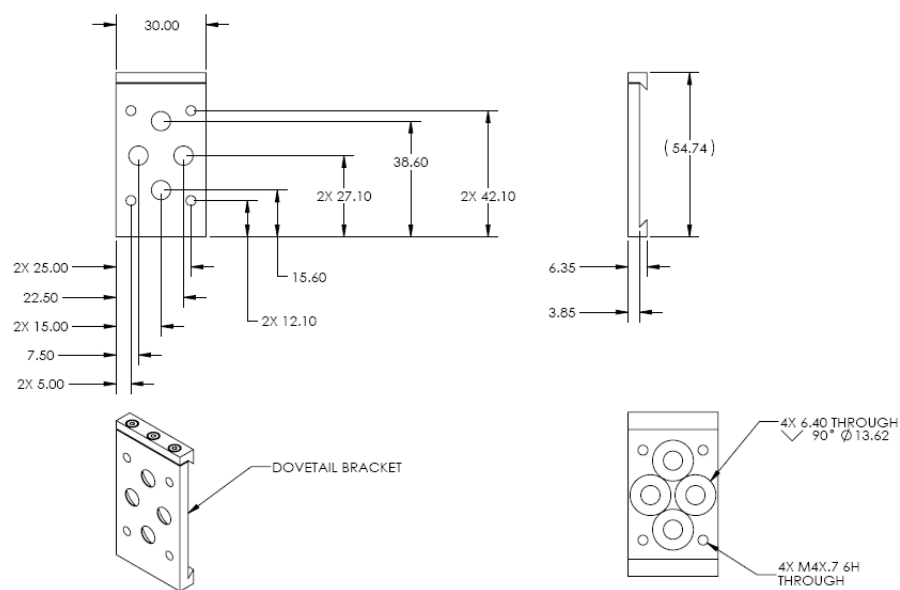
HG-CH Camera Head Mounting Hardware, Dovetail Clamp (in mm)
